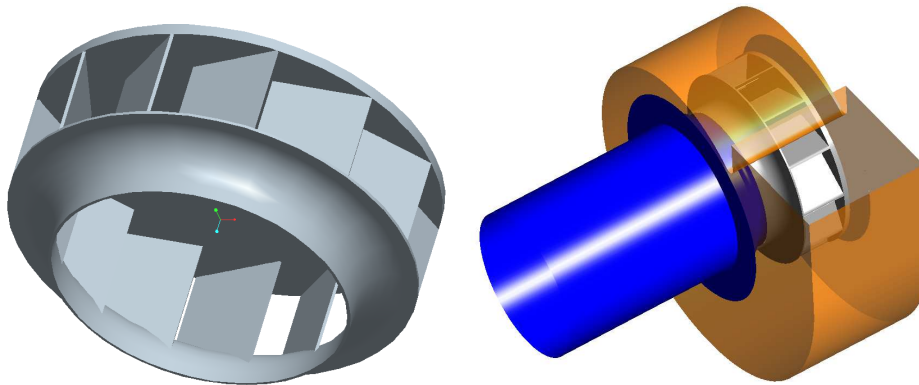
CAD model of the basic impeller and the complete fan (g01)
